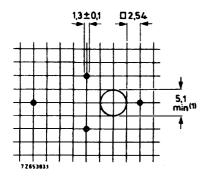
Hole pattern for mounting on a printed-wiring board. (1) Hole for bottom adjustment, if required.
